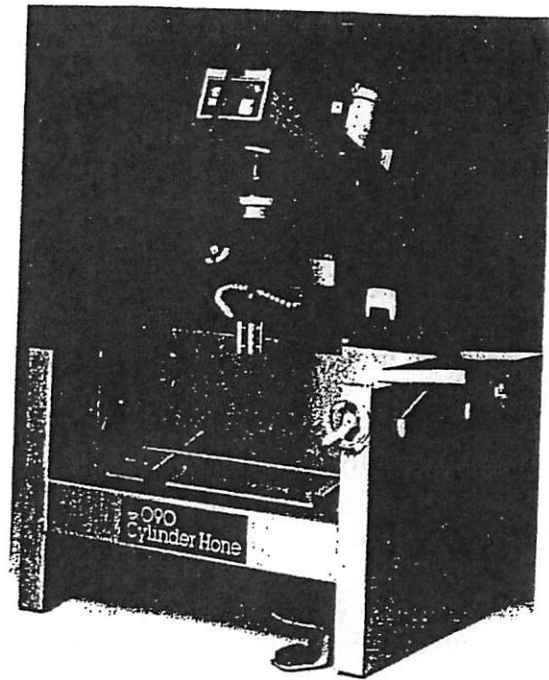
Automatic cylinder hone machine. *Courtesy of Kwik-Way Manufacturing Company
